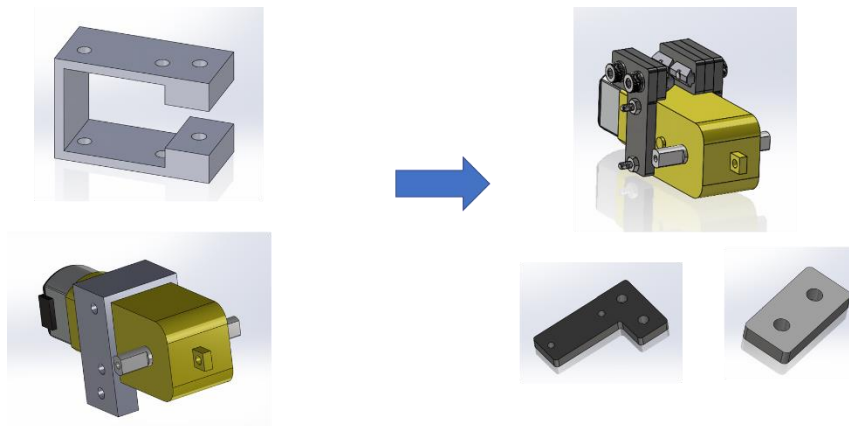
Motor mounting bracket with 3D features, simplified to manufacture using flat material stock
